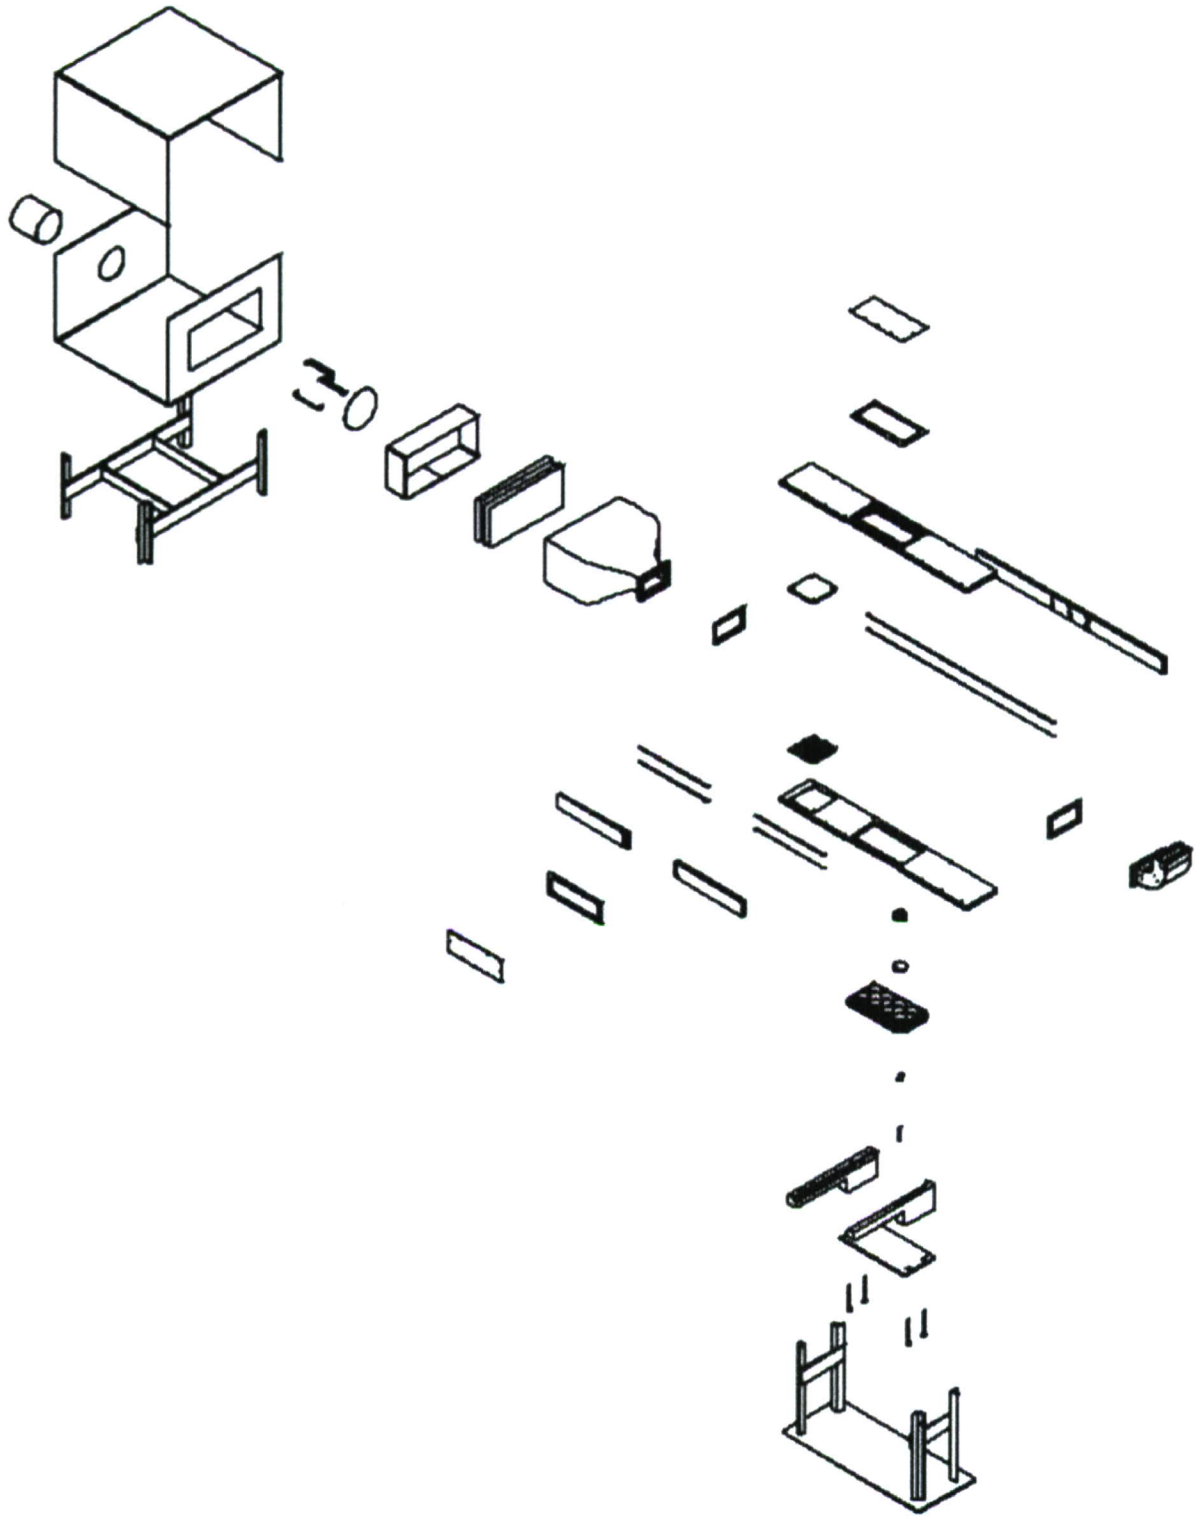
Exploded Parts View of Conditioning Wind Tunnel
